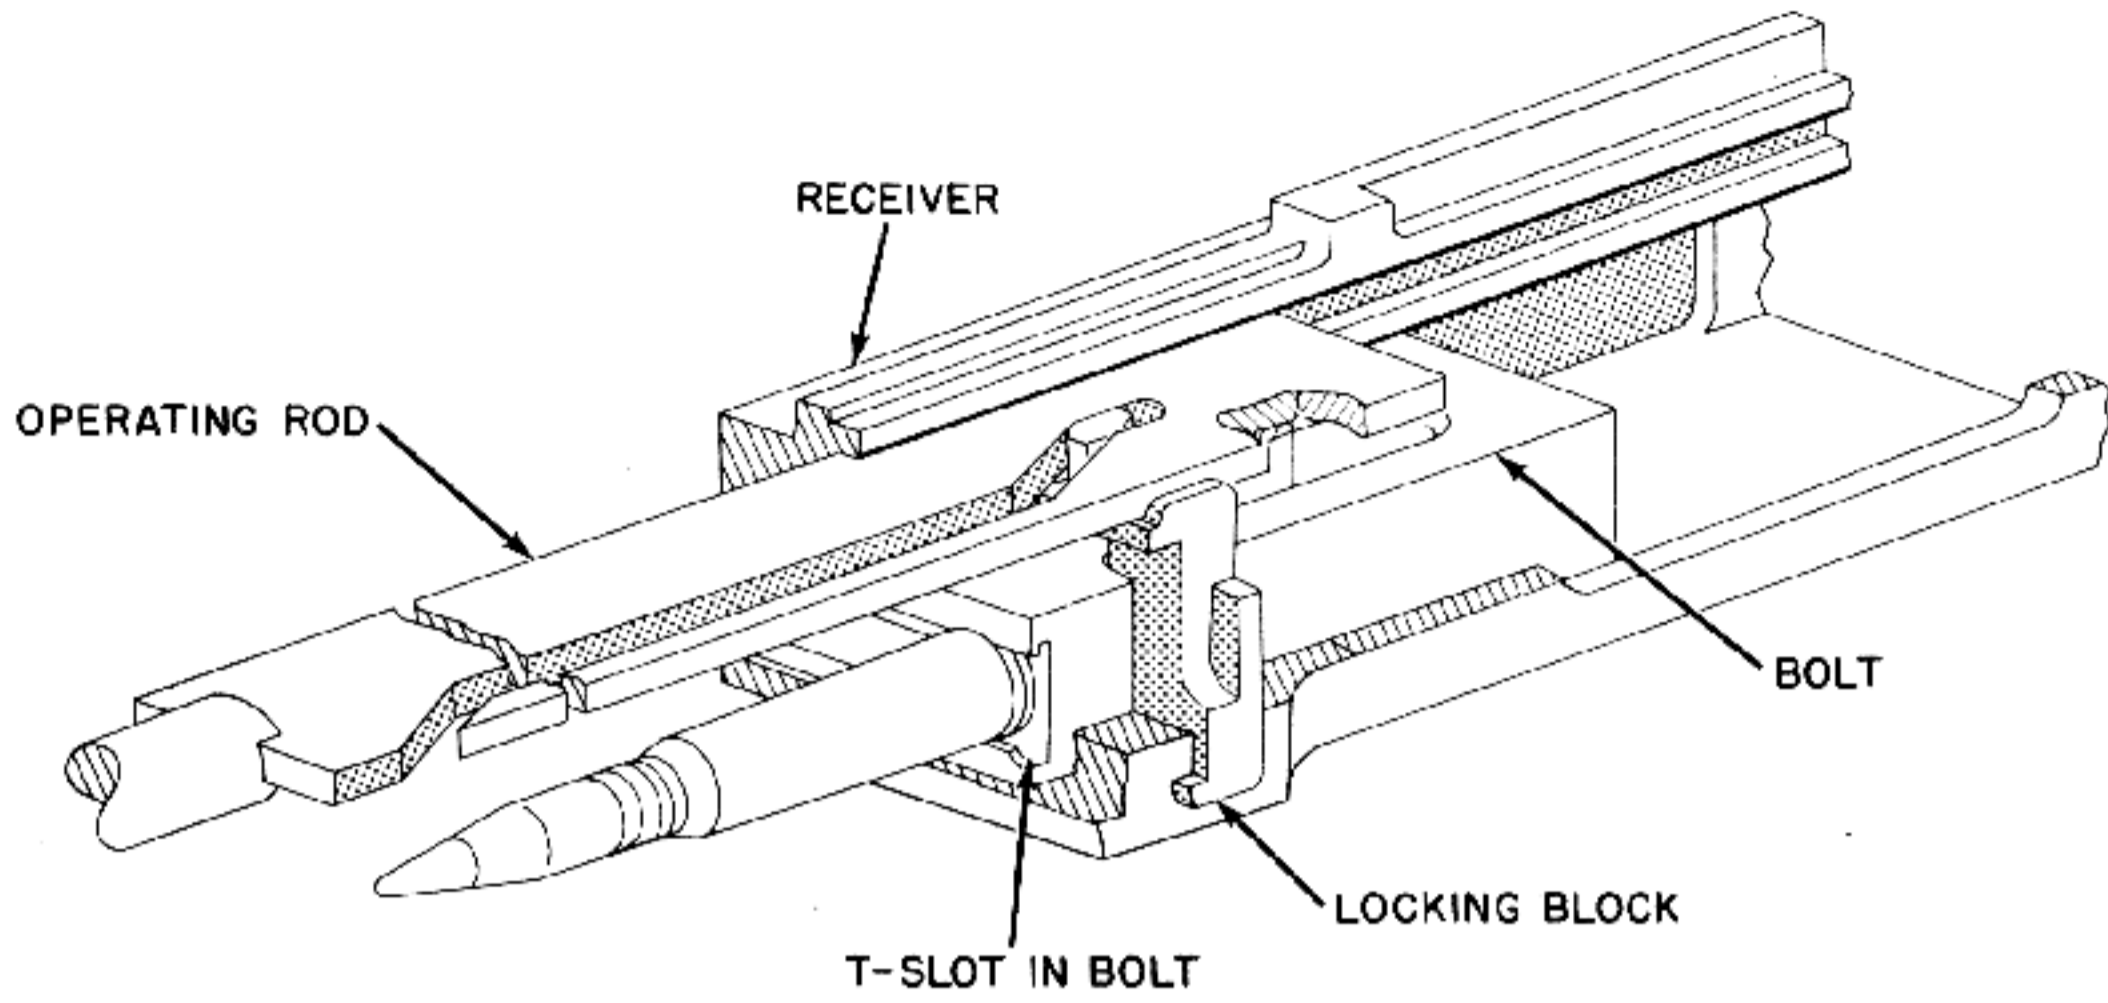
Cam Grooved Operating Rod Moves Locking Block Free of Bolt.
